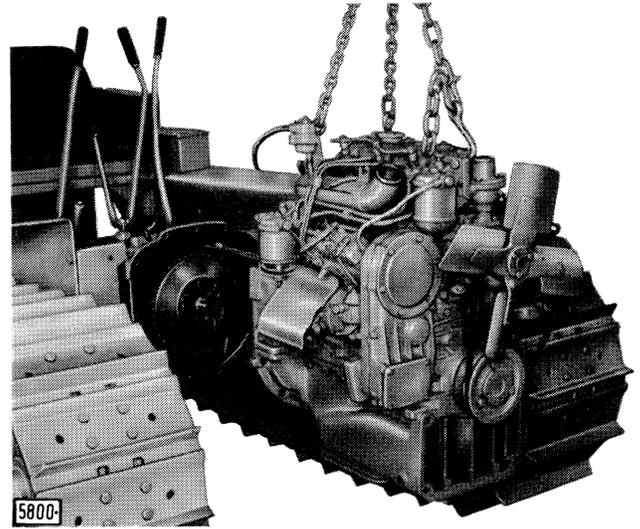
Removing (or Refitting) the Power Unit using Lifting Chain Part No. 290740 (455 C - 505 C)
